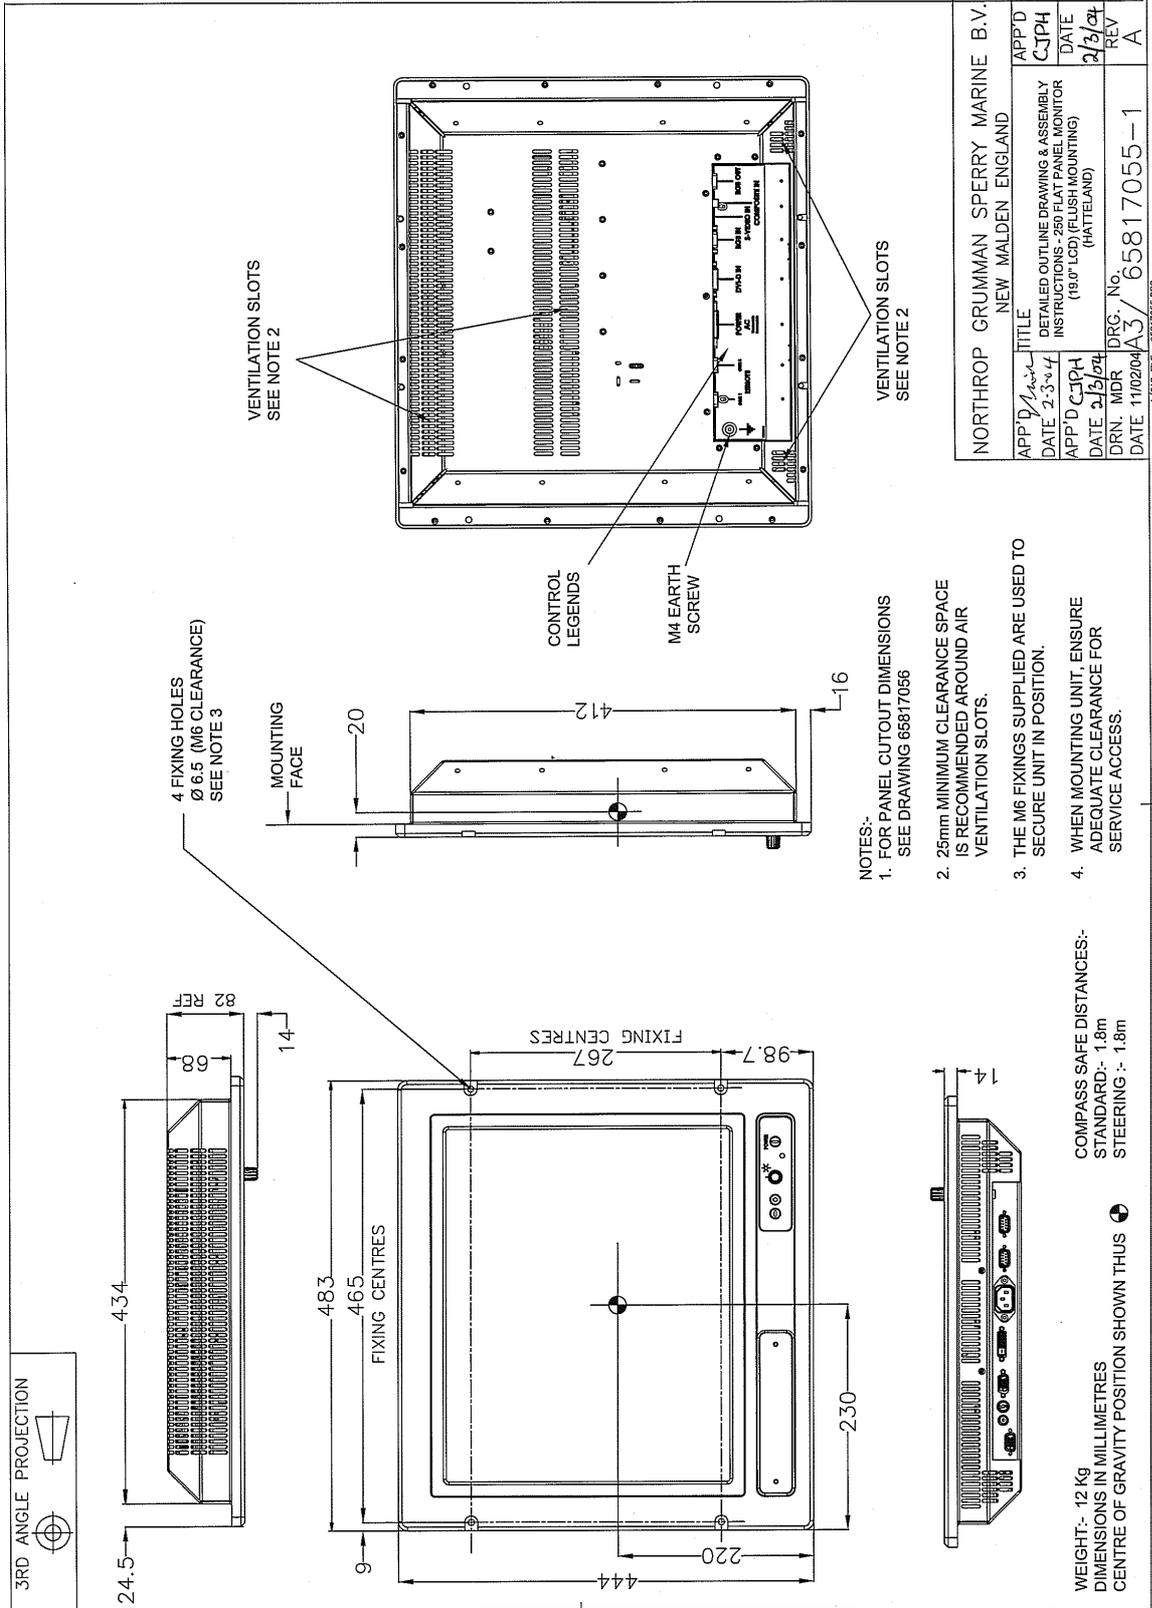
250 Monitor Module (FPD 19'') Outline Drawing
